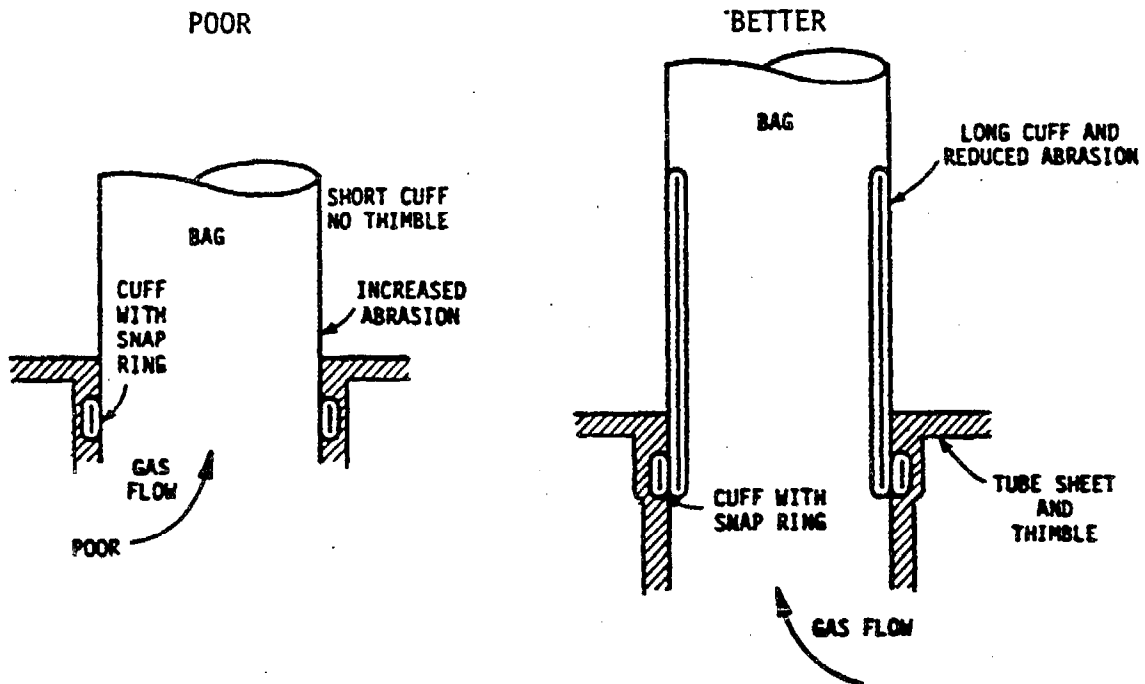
Methods of Bag Attachment in Shaker and Reverse Air Fabric Filters¹²
